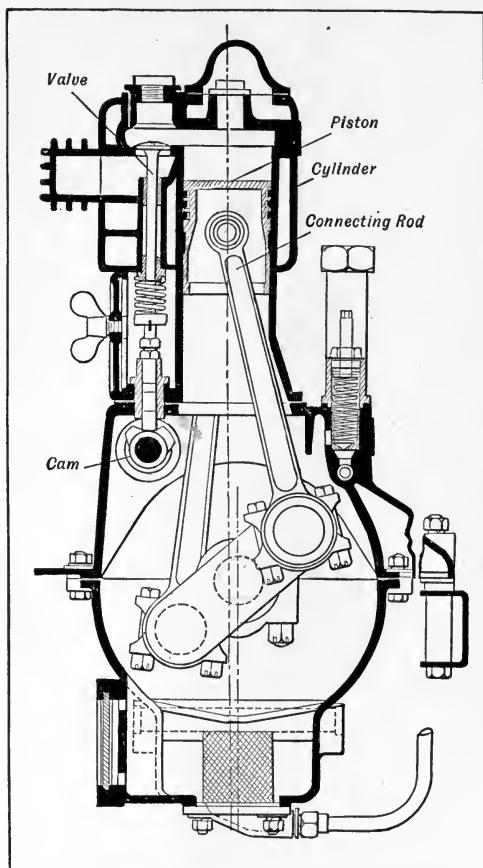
End View Humber (English) Motor, Depicting Off-set Cylinder Construction.
